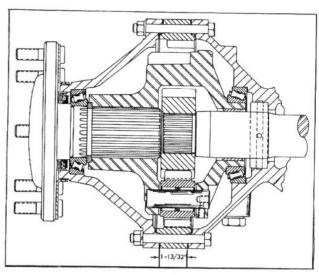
AXLE PLANETARY ASSEMBLY — WIDE RING GEAR
